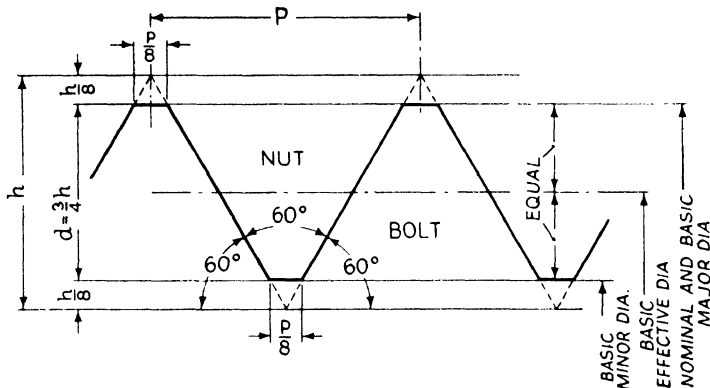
BASIC FORM OF METRIC (S.I.) THREADS
